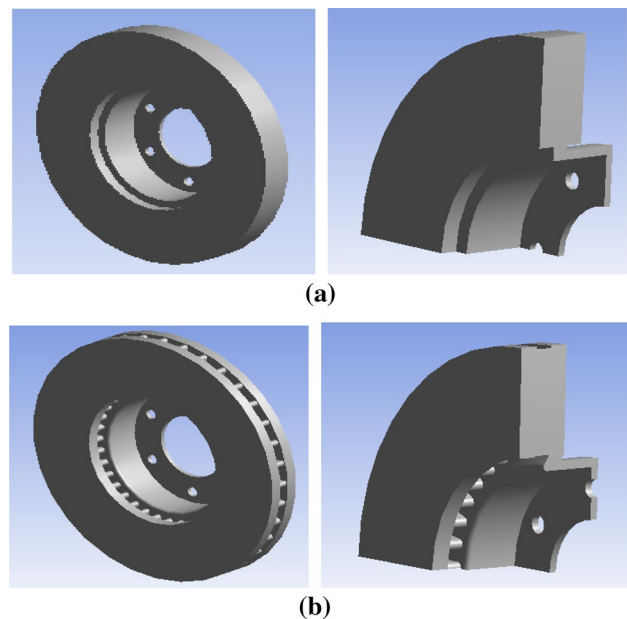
CAD model of discs brakes: a Full disc. b Ventilated disc
